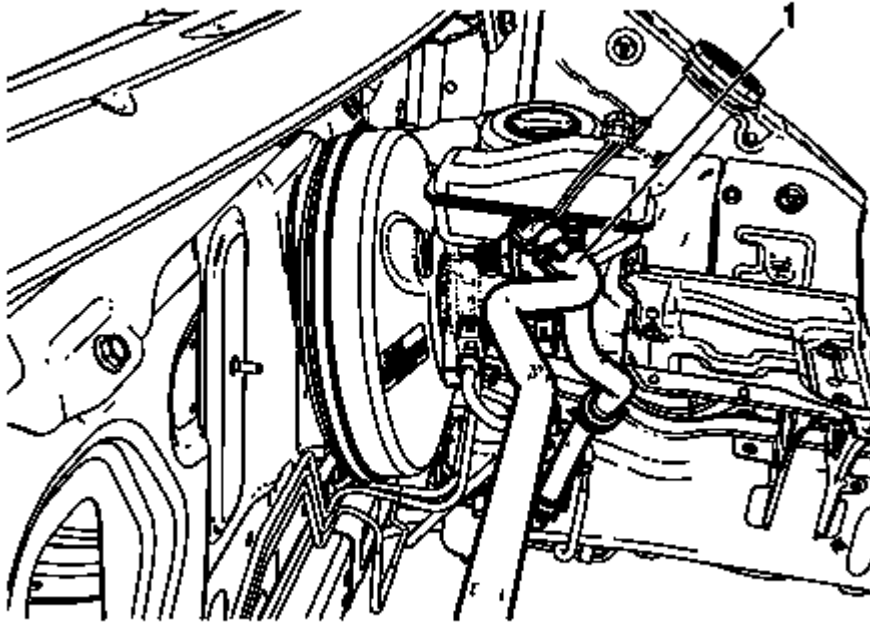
Power Brake Booster Vacuum Hose And Vacuum Switch Assembly
